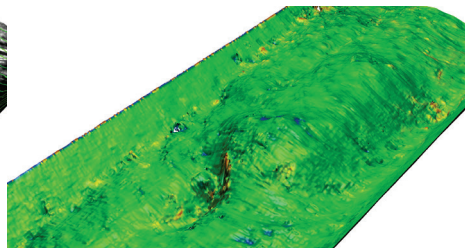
Inspection system for weld seams (IAPG).
